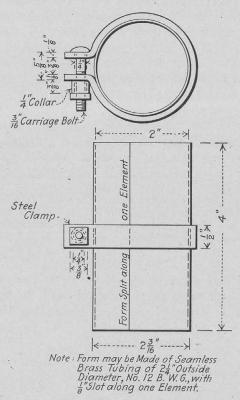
Details for 2 by 4-in. Cylinder Form.
